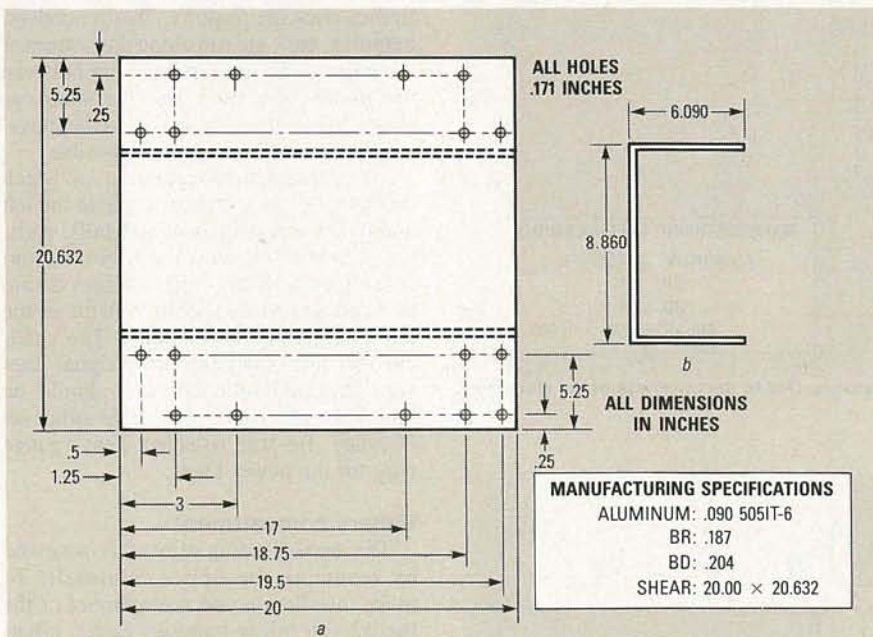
USE THIS GUIDE to cut, drill and bend the clamshells. Cutting and drilling information is provided in a; bending dimensions are shown in b.
